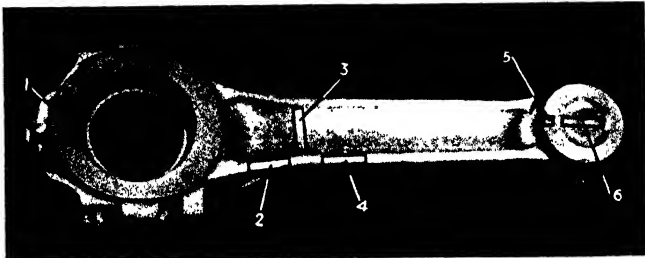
HIGH-STRENGTH RR56 ALUMINIUM ALLOY CONNECTING ROD FORGING FOR DIESEL ENGINE
